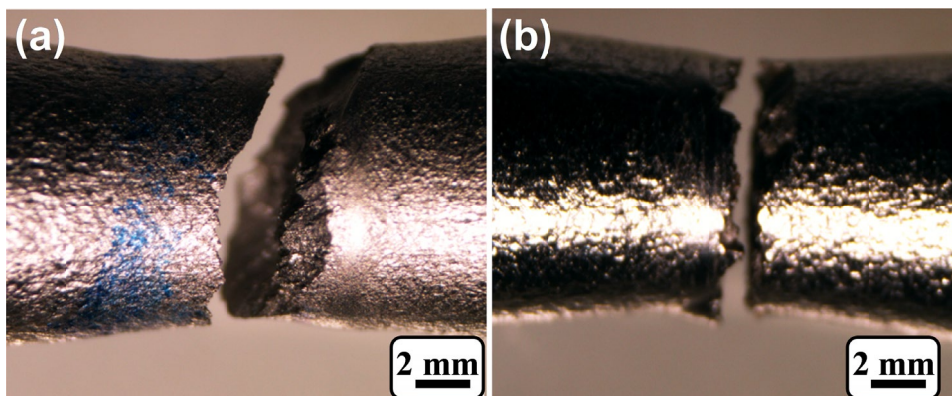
Fracture nature of tensile test pieces: (a) forge elimination, (b) forge application
